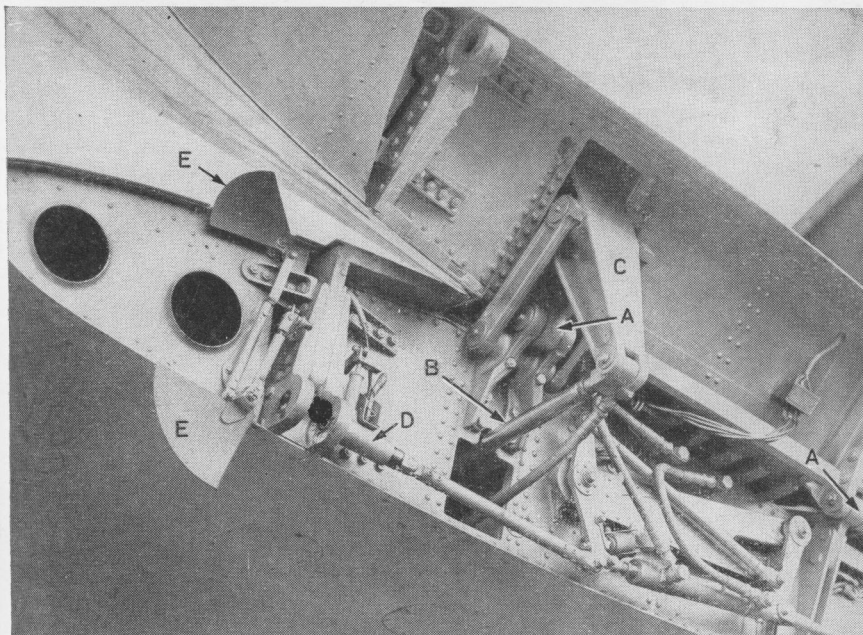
Wing folding mechanism of the de Havilland Hornet, showing hinge points (A) of the outer panel which swings up and over the fuselage. Folding is accomplished hydraulically, with piston arm (B) actuating linkage (C). This piston has its hydraulic supply linked through sequence valves to locking pins (D). By a second lever, which the pilot cannot operate until the folding actuating lever has been moved, locking pins engage withdrawing pins, showing metal flags (E) unless the locking pins are secure.
